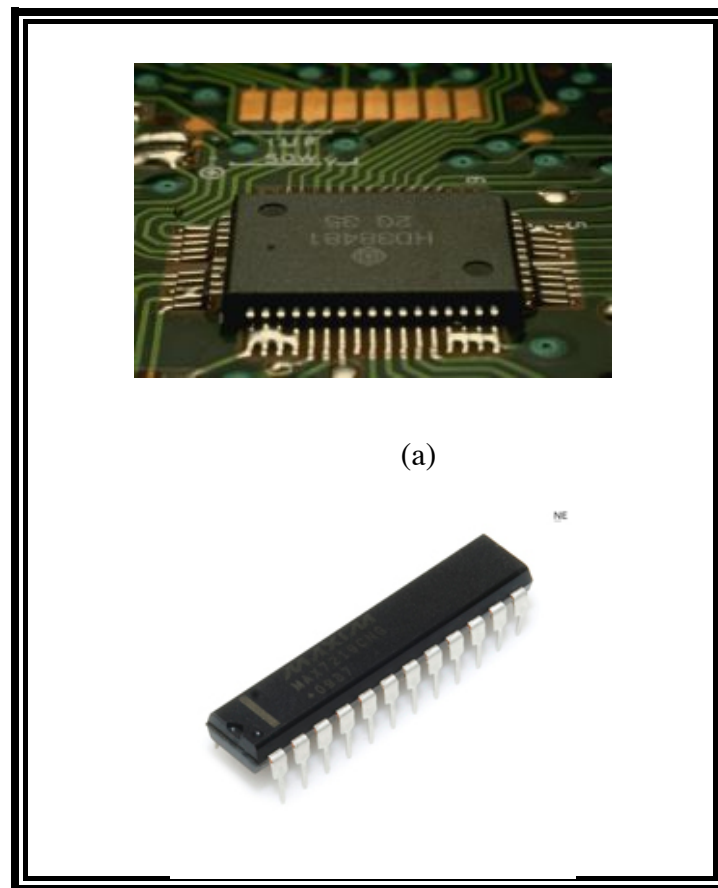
PCB components. (a) Surface Mount Chips used on PCBs and (b) DIP Chips used for testing purposes.
